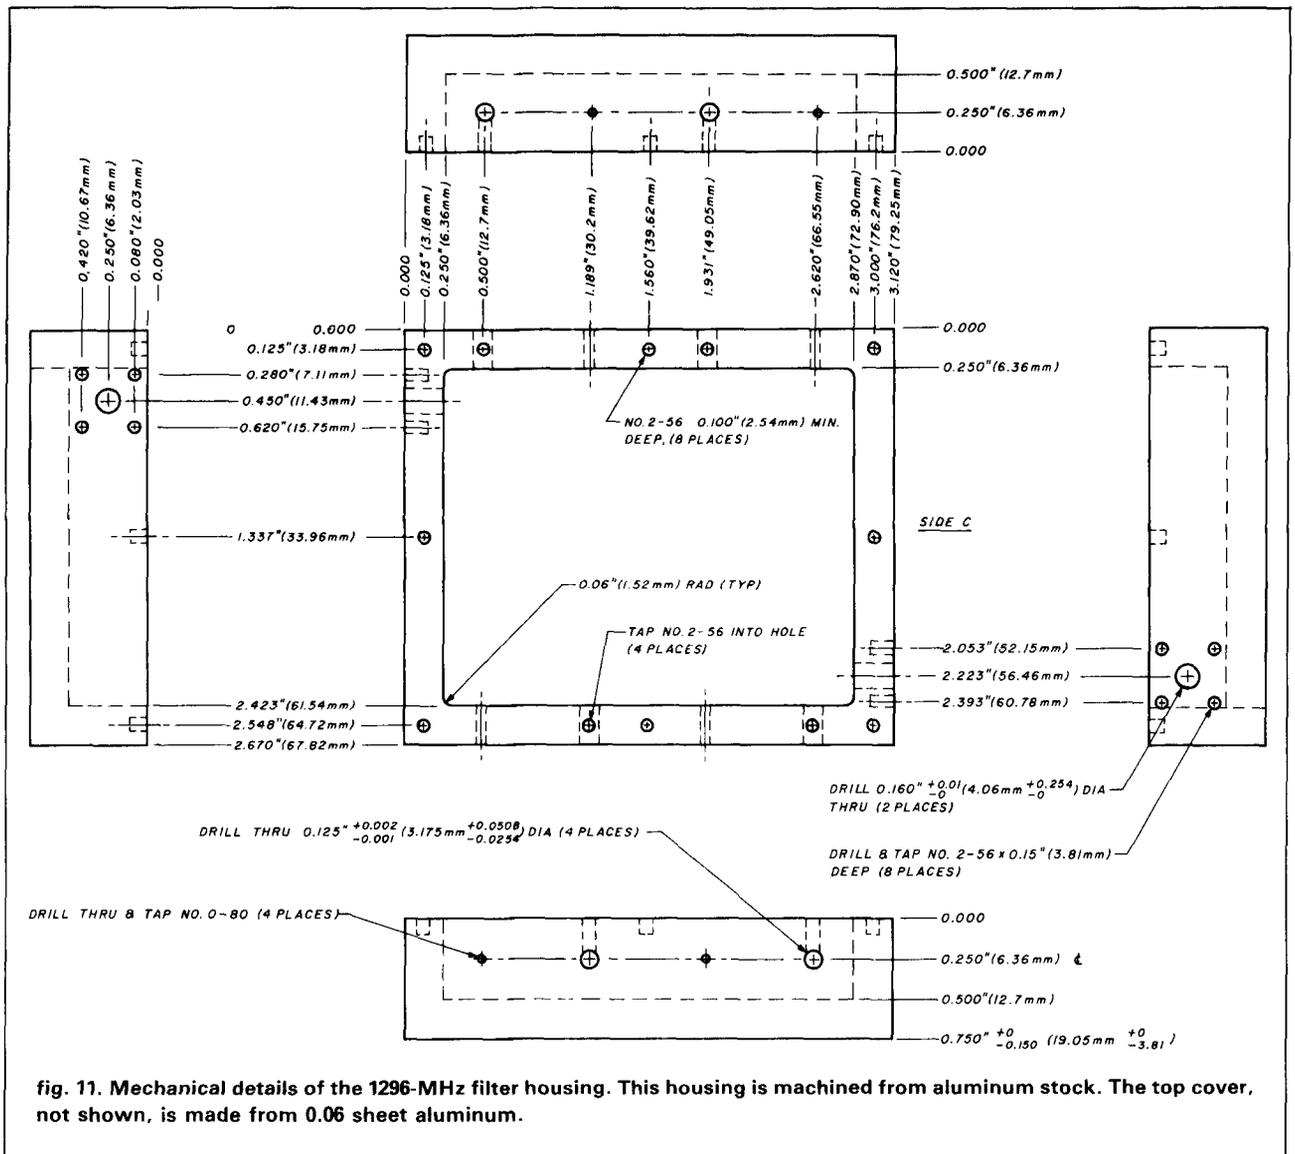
Mechanical details of the 1296-MHz filter housing. This housing is machined from aluminum stock. The top cover, not shown, is made from 0.06 sheet aluminum.
